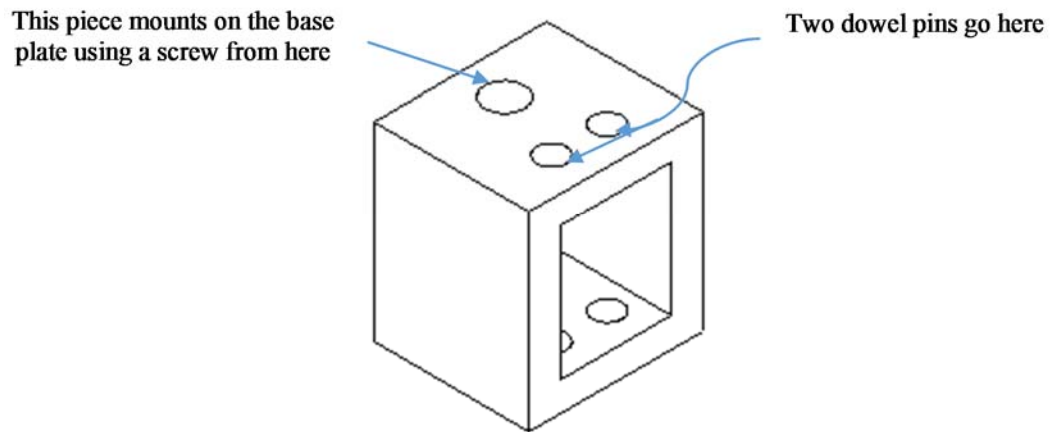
Holding block for preventing rotation of the actuator lead-screws.
